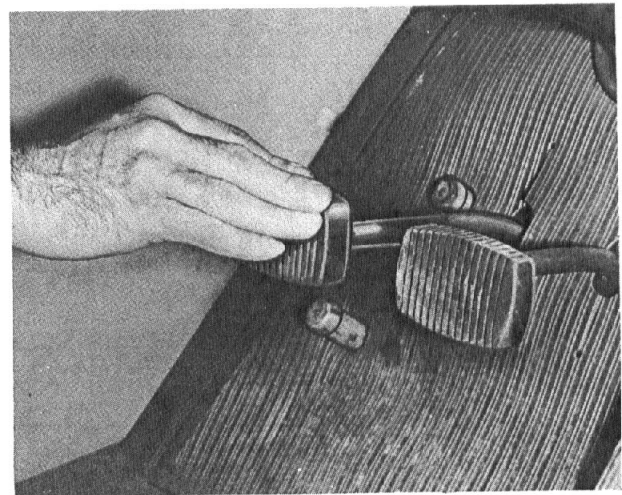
Checking Clutch Pedal 'Free Travel'.
